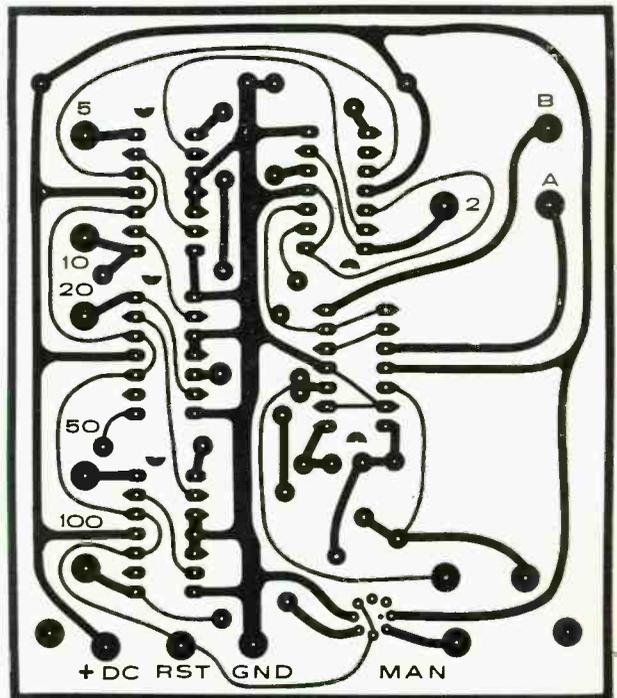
Actual-size printed board for the timing module. This board is the same size as that used for the decimal counting unit, greatly simplifying the packaging of the completed stopwatch.
